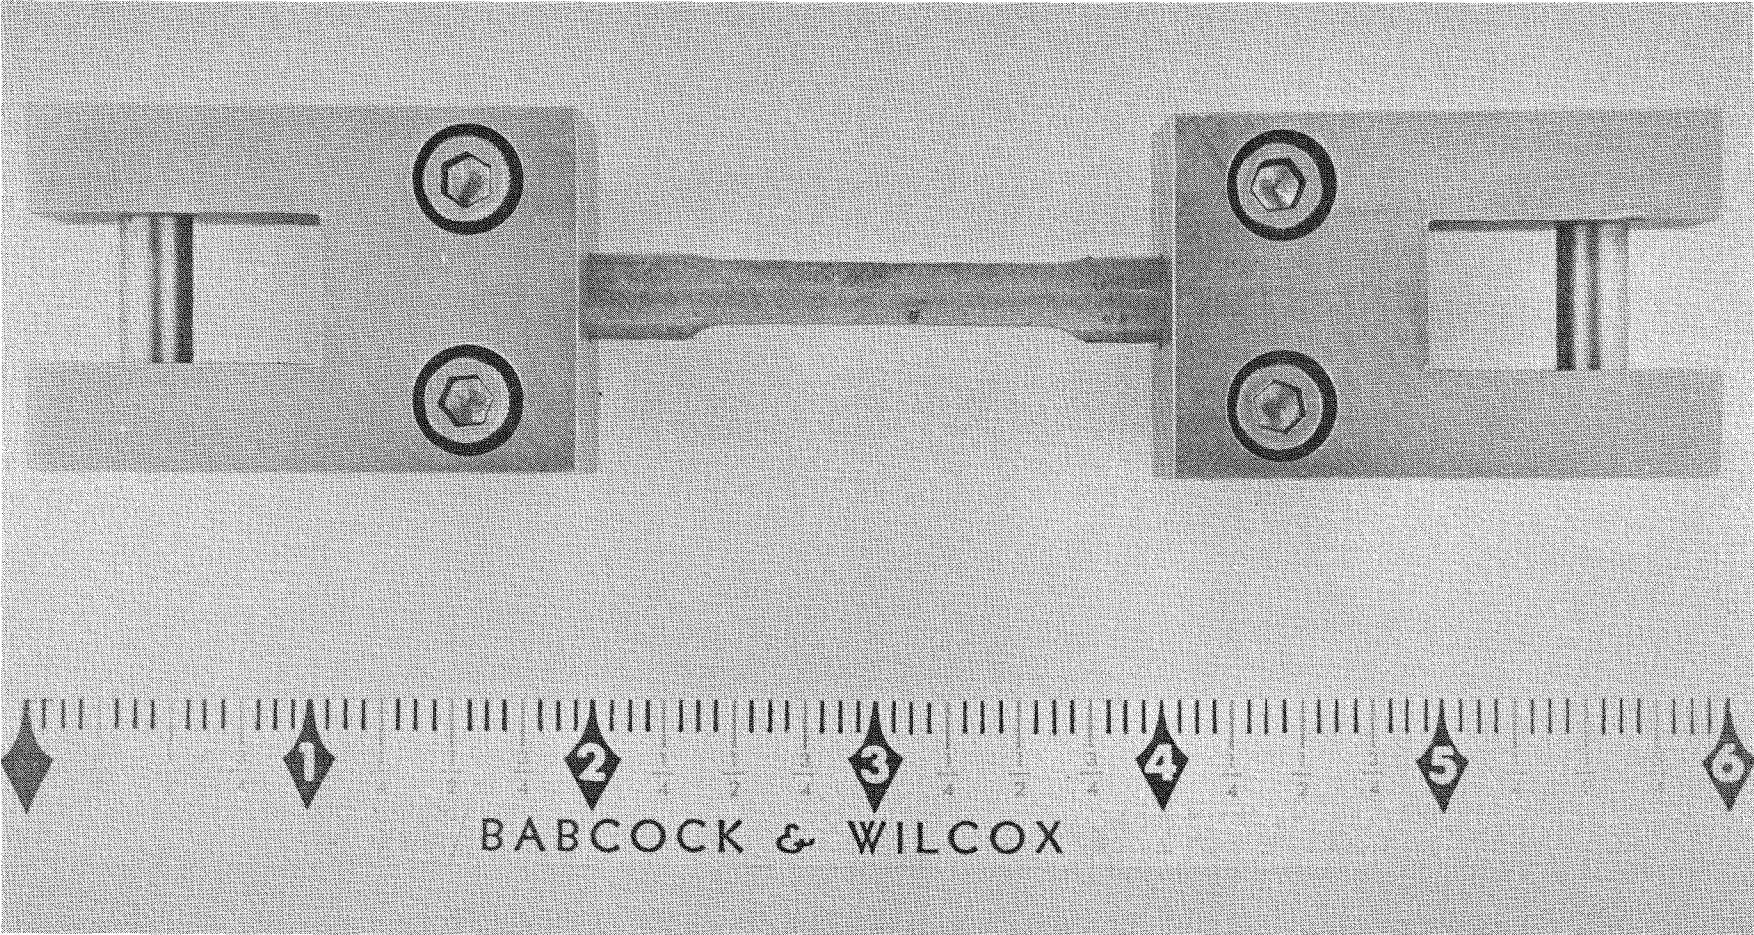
Tensile Specimen for Stainless Steel Cladding
